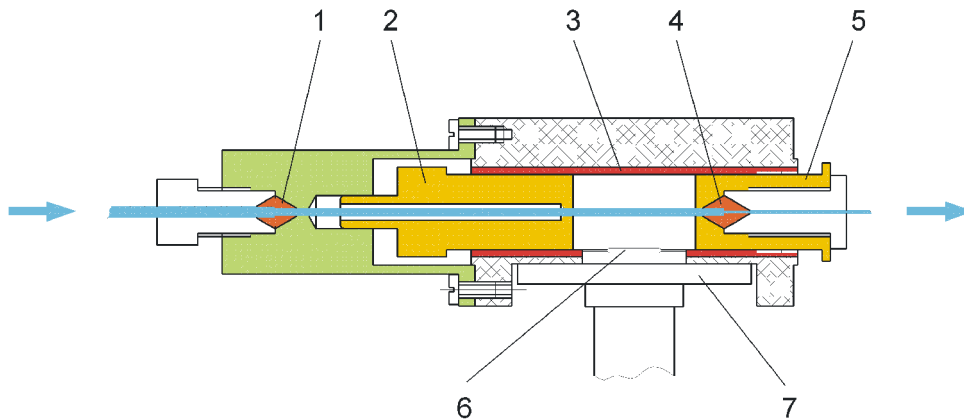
Schematic drawing of the resonator design: (1) conical squeeze joint, Polytetrafluoroethylene (“PTFE”)/Teflon[®]; (2) plunger, nonmagnetic brass, 2 μm silver coating; (3) hollow bore cylinder, ID 11 mm, nonmagnetic brass, 2 μm silver coating; (4) capillary necking; (5) plunger, nonmagnetic brass, 2 μm silver coating; (6) slit iris, 5.6 mm long, 0.20 to 0.30 mm wide; (7) WR-19 waveguide flange, copper.
